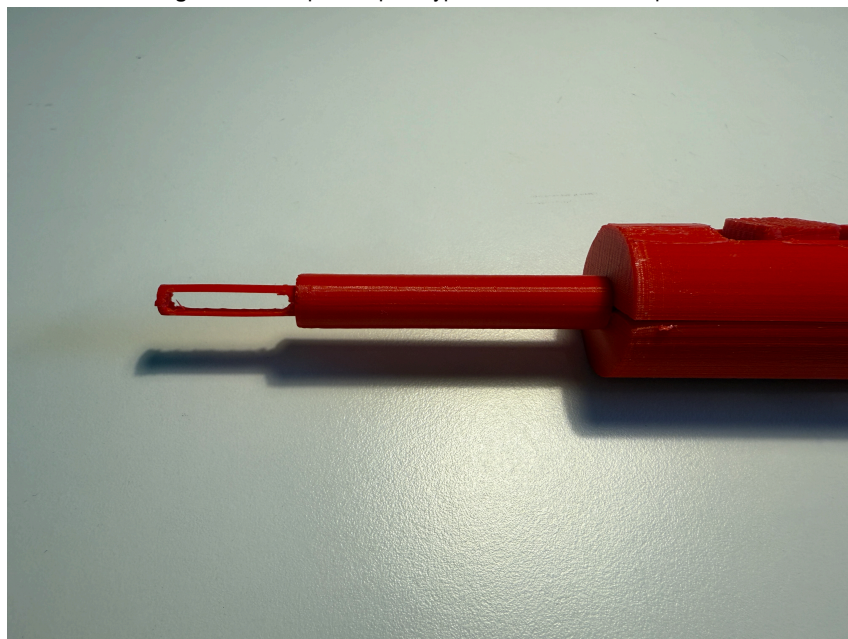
3D printed prototype of inner needle with an outer needle and a handpiece
